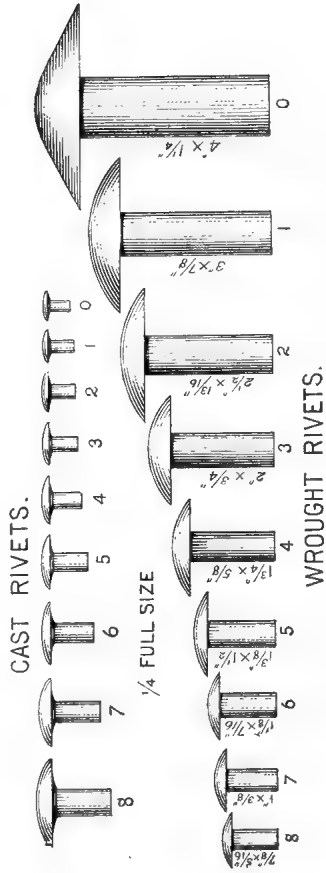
Size and Shape of Copper Rivets, One-Quarter Size.
